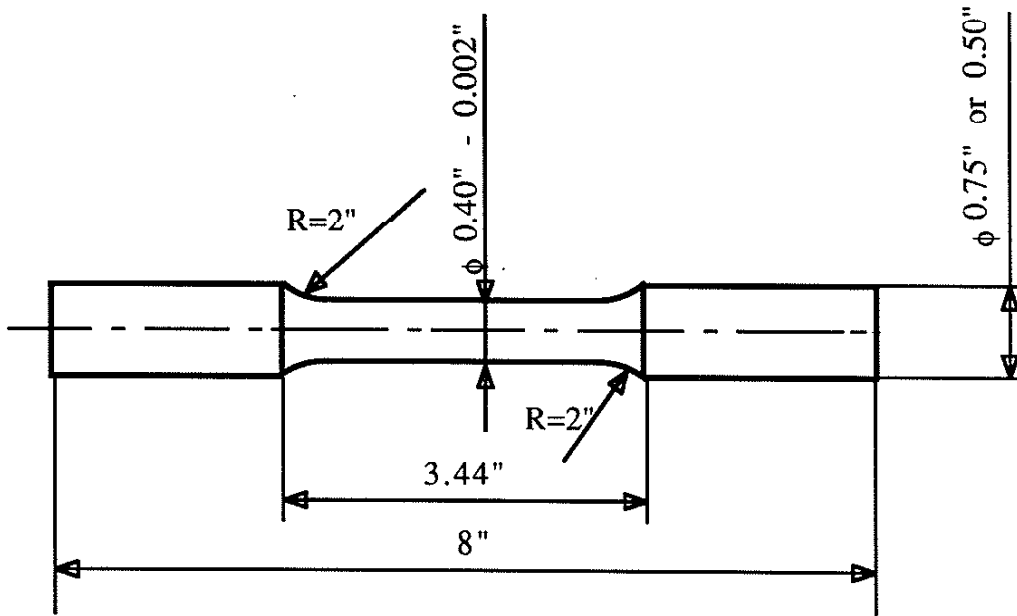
Dimensions of the cast iron specimen in the machined condition.
